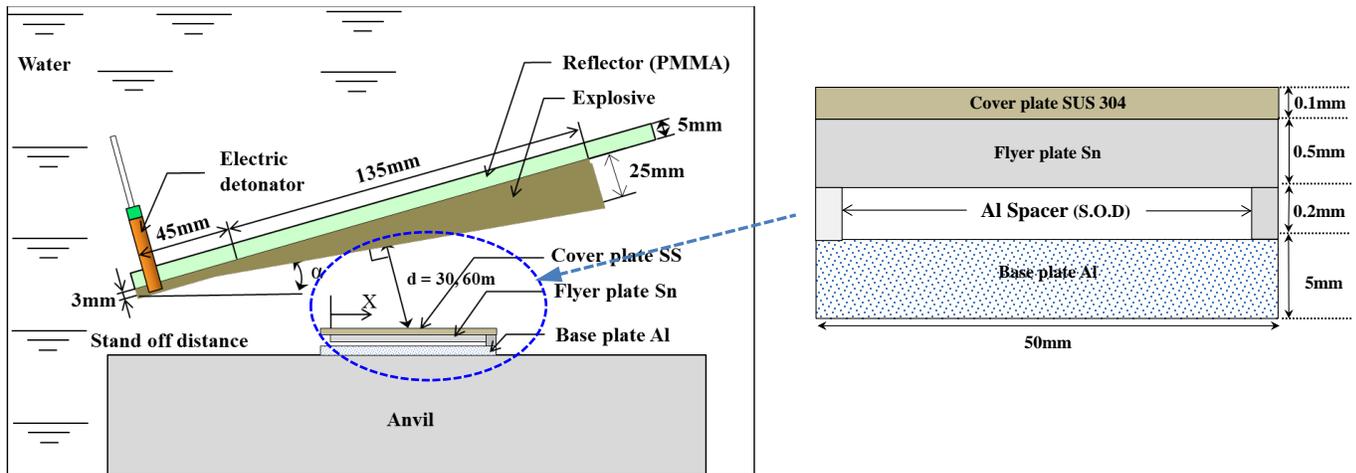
Schematic outline of explosive welding using underwater shock wave technique.
